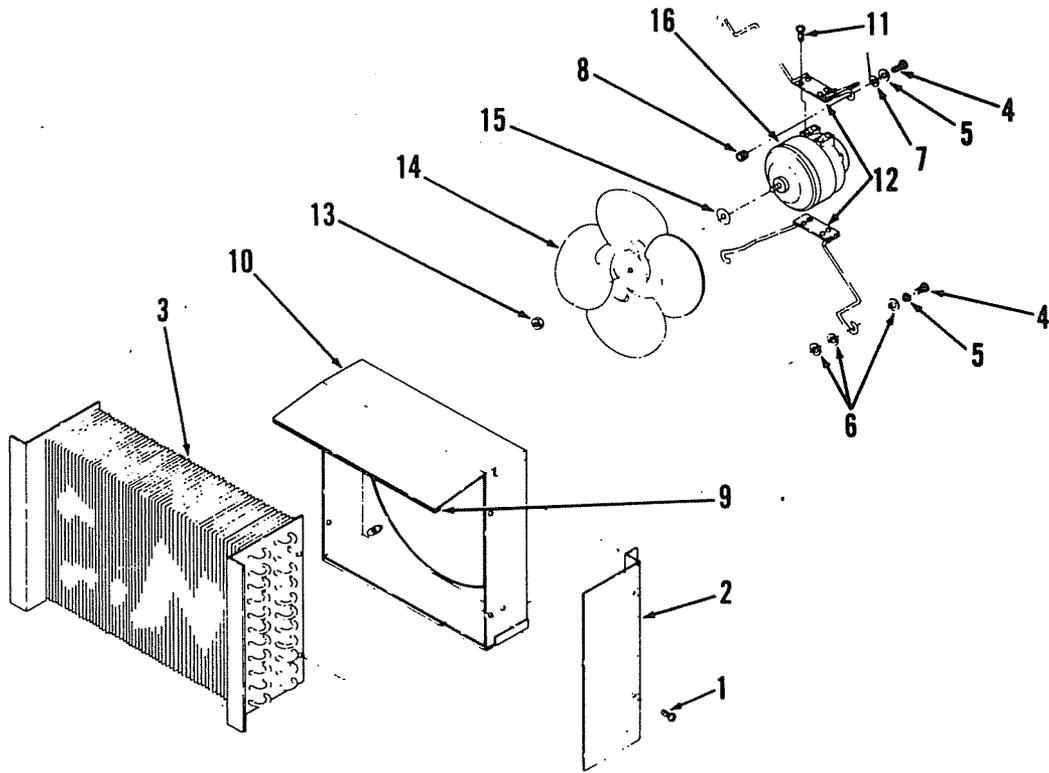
CONDENSER FAN AND SHROUD ASSEMBLY
